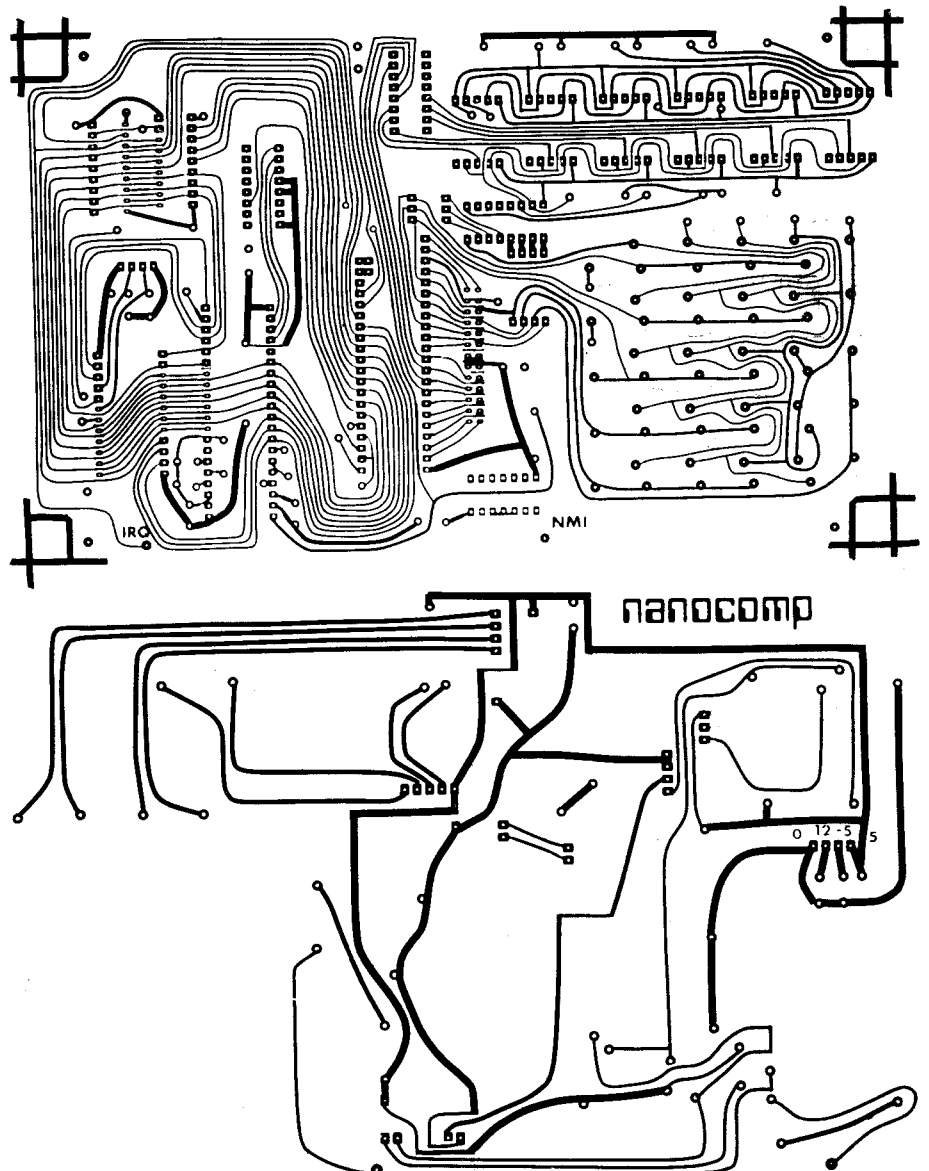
Assembled printed circuit board and layout details. The board measures 200 x 120mm.
